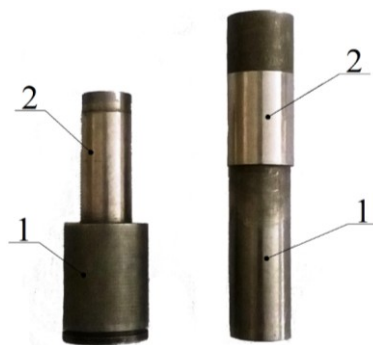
Cathode assemblies produced by pulse diffusion welding: molybdenum core (1) with Pt–Ba emitter (2)
